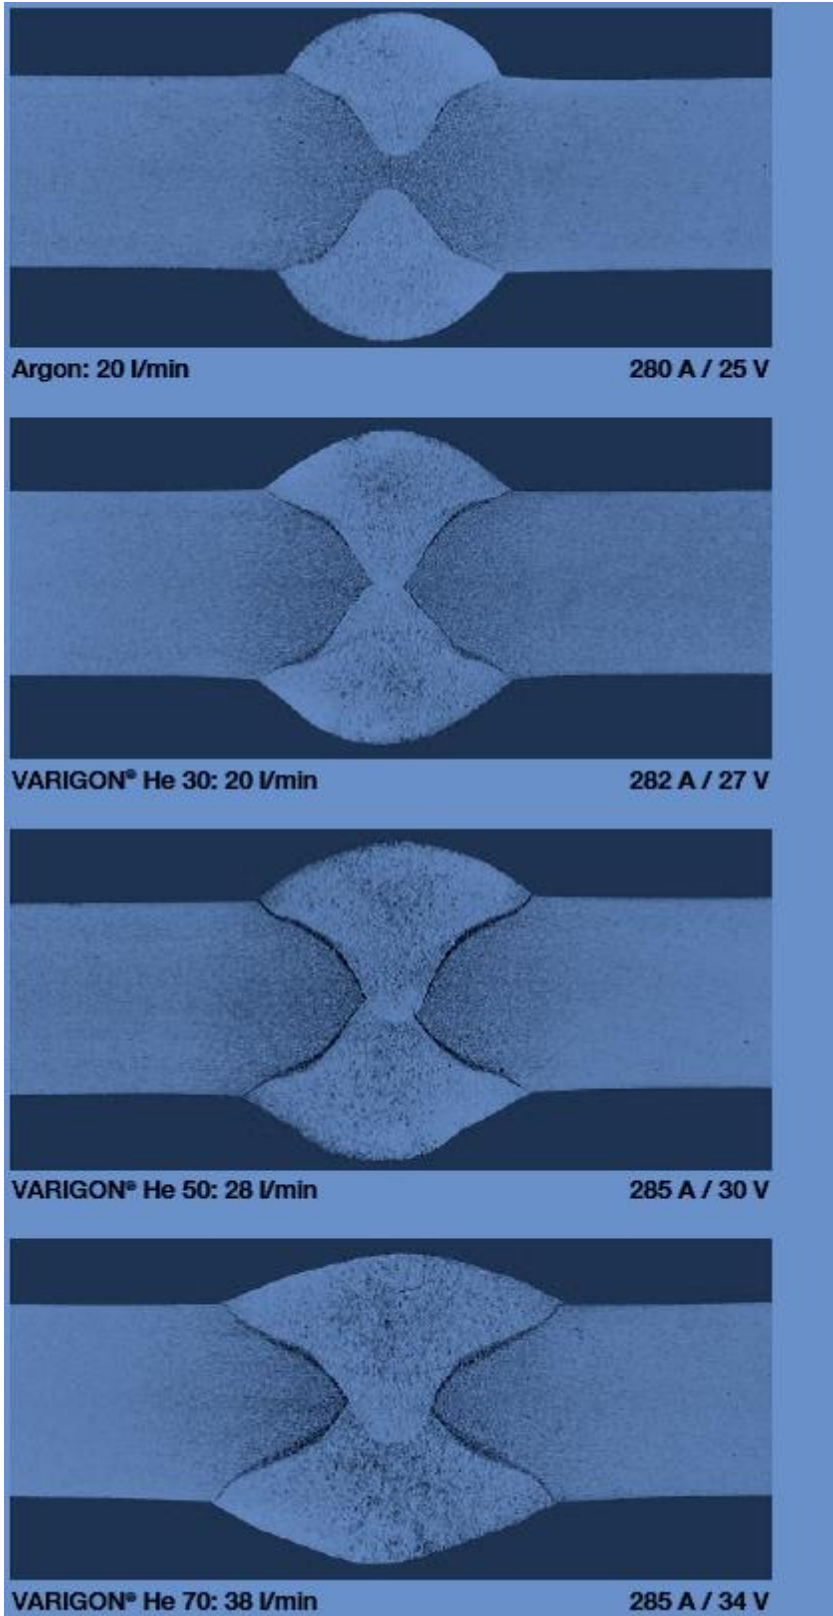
Helium in the shielding gas alters the weld geometry and affects welding voltage
